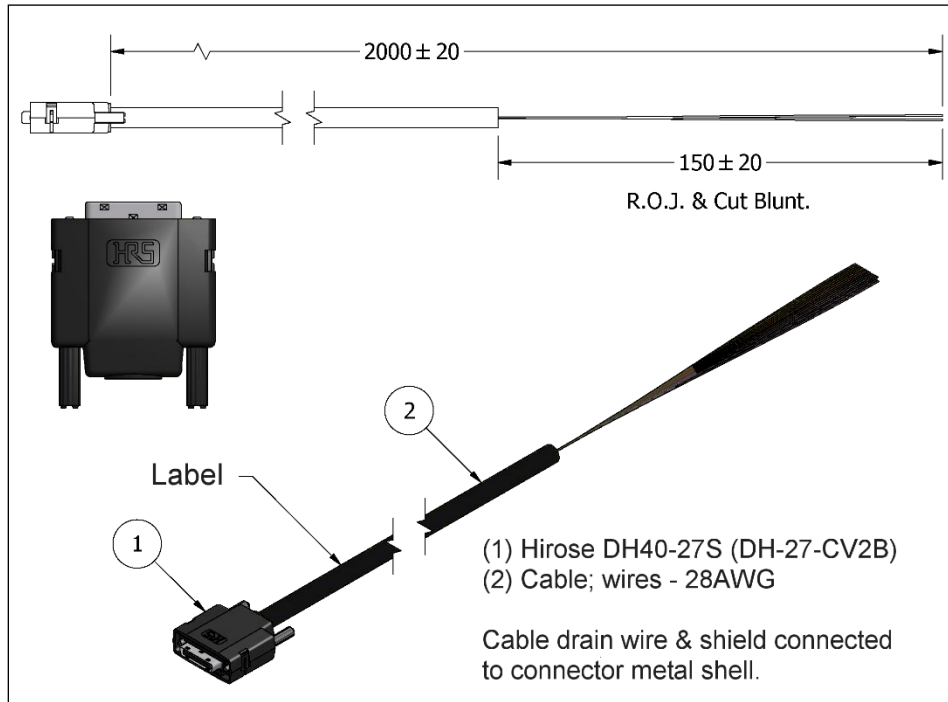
DH60-27P Cable No. OR-YXCC-27BE2M1 Detail
